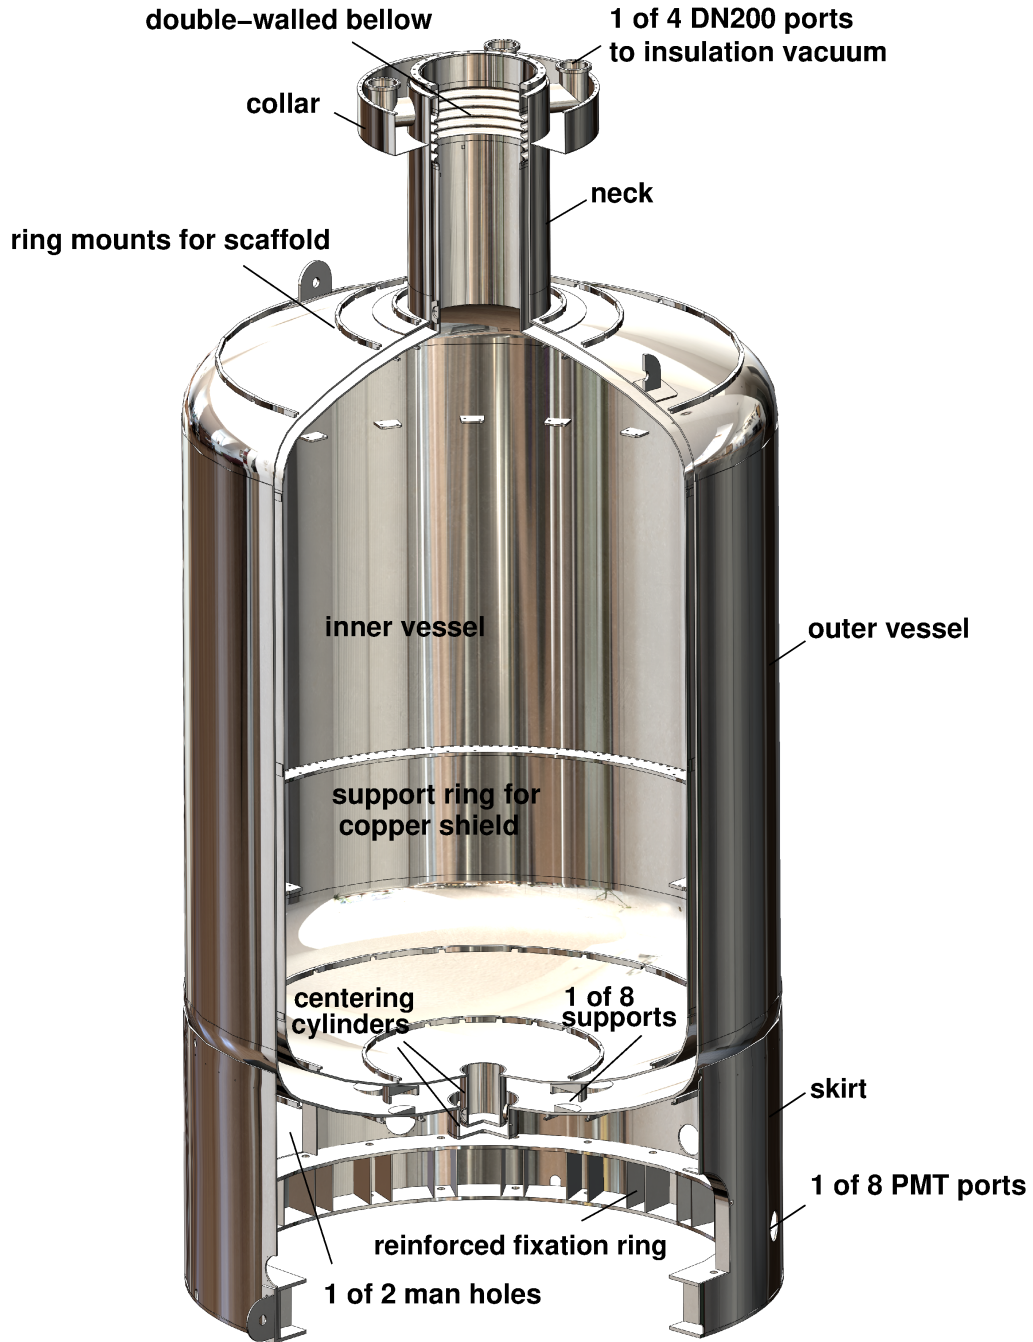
CAD drawing of the steel parts of the GERDA cryostat.
